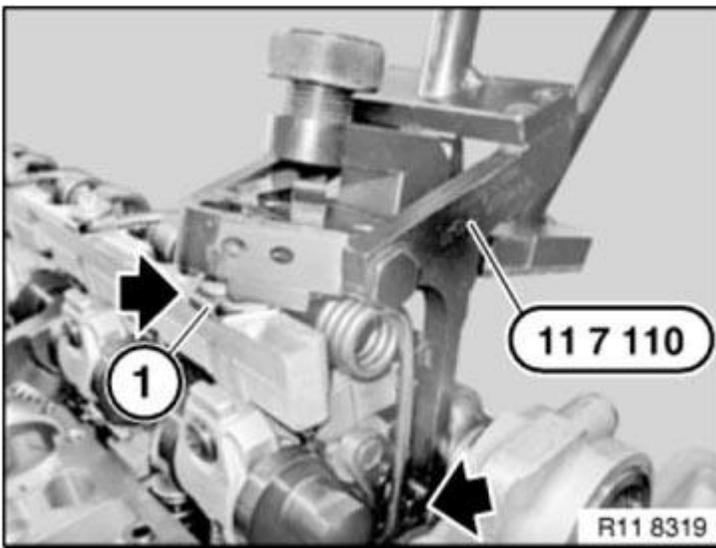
Positioning Special Tool (11 7 110) On Return Spring
